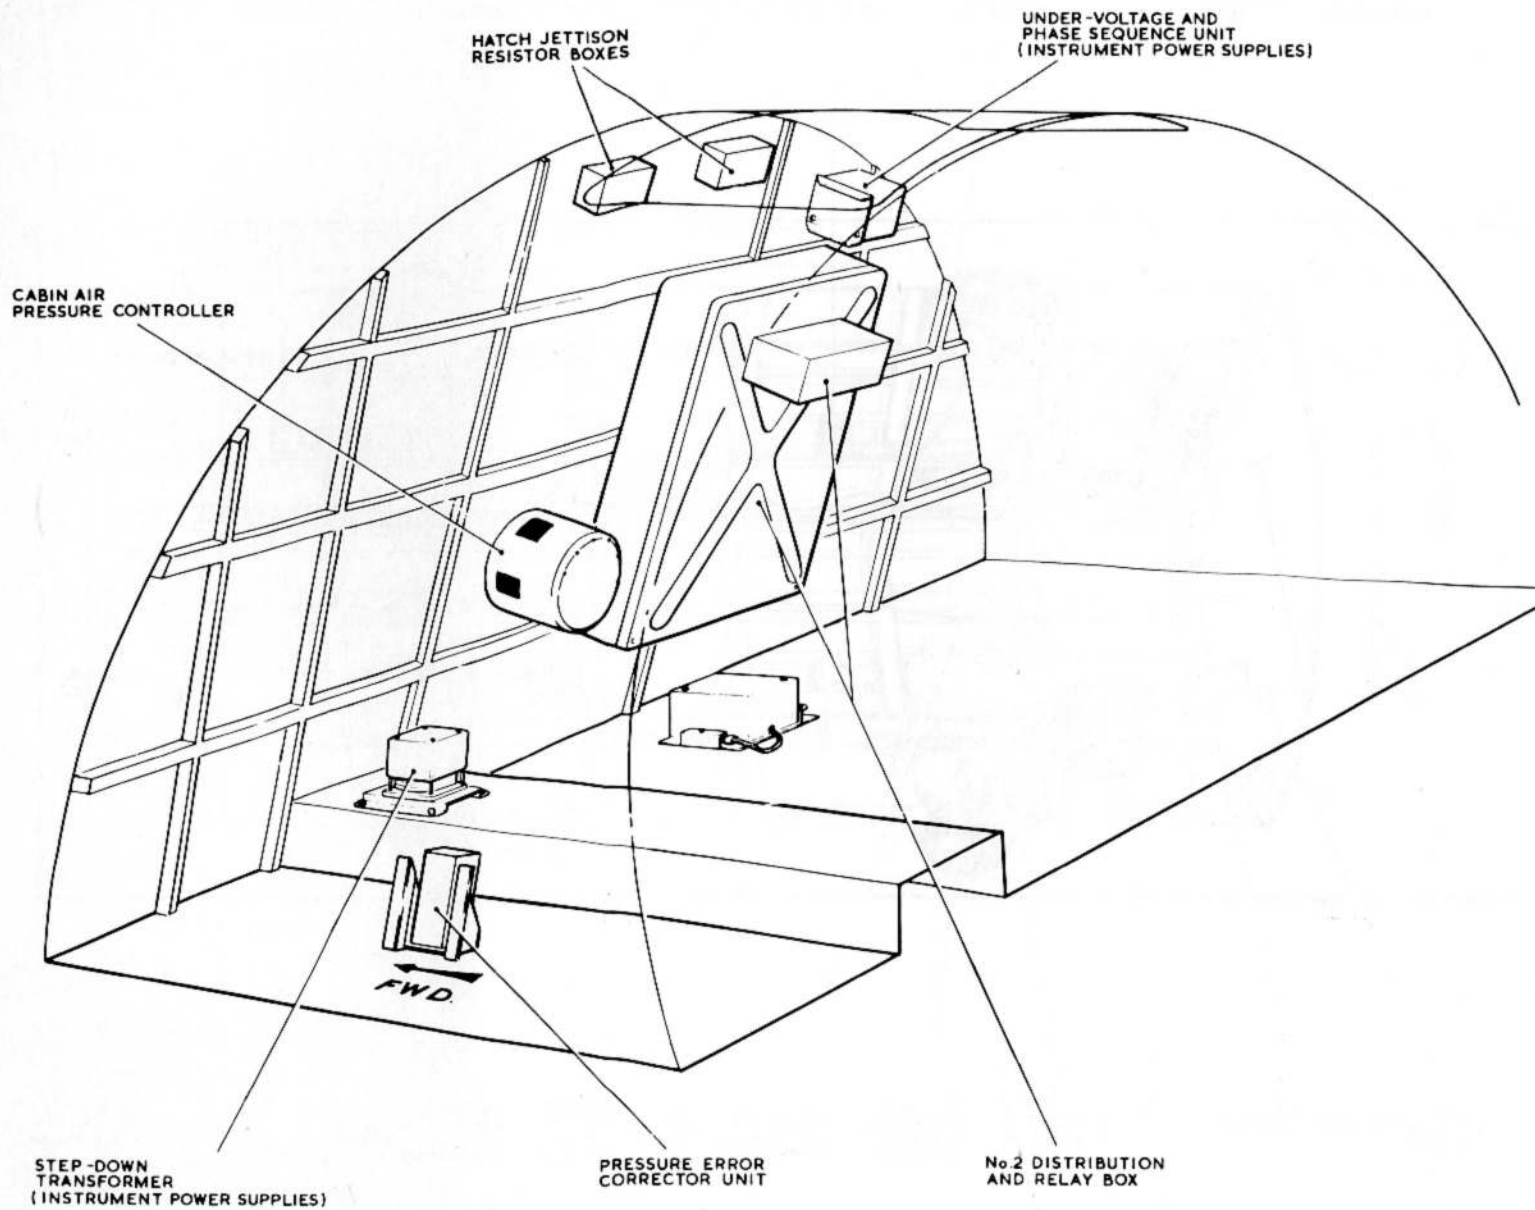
ELECTRICAL INSTALLATION - UPPER EQUIPMENT COMPARTMENT
